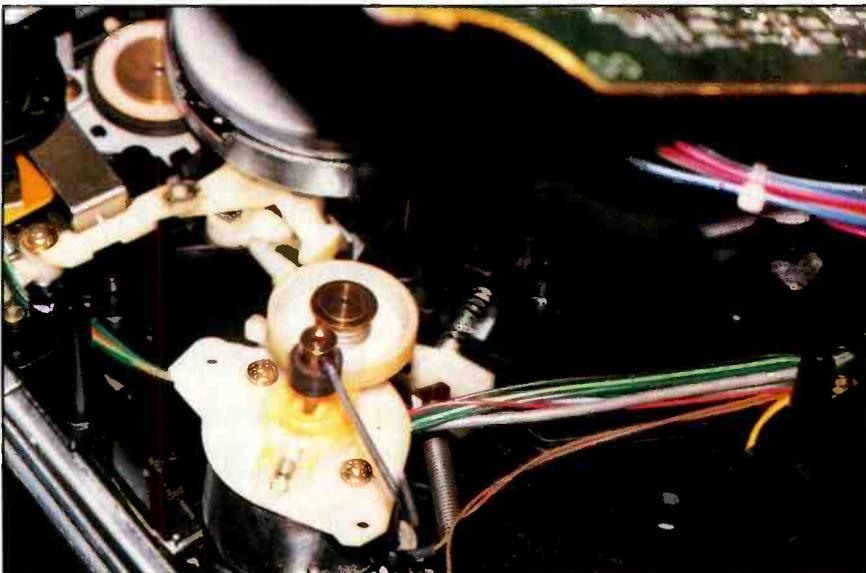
With the motor and wind assembly exposed, remove the wind assembly roller using an Allen key.
